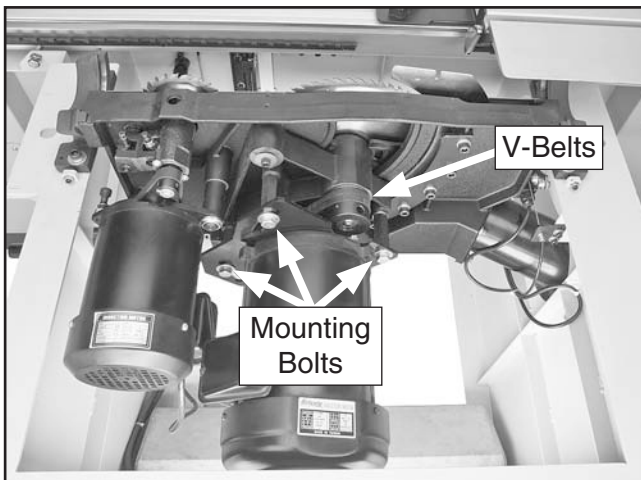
Locations of main motor mounting bolts (cast iron table removed).
